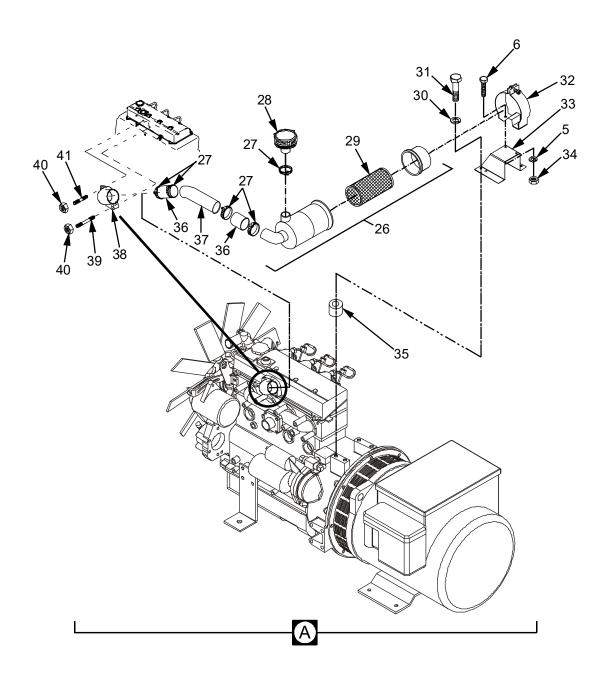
Engine-Generator Assembly 1013012 (Sheet 3 of 7).
